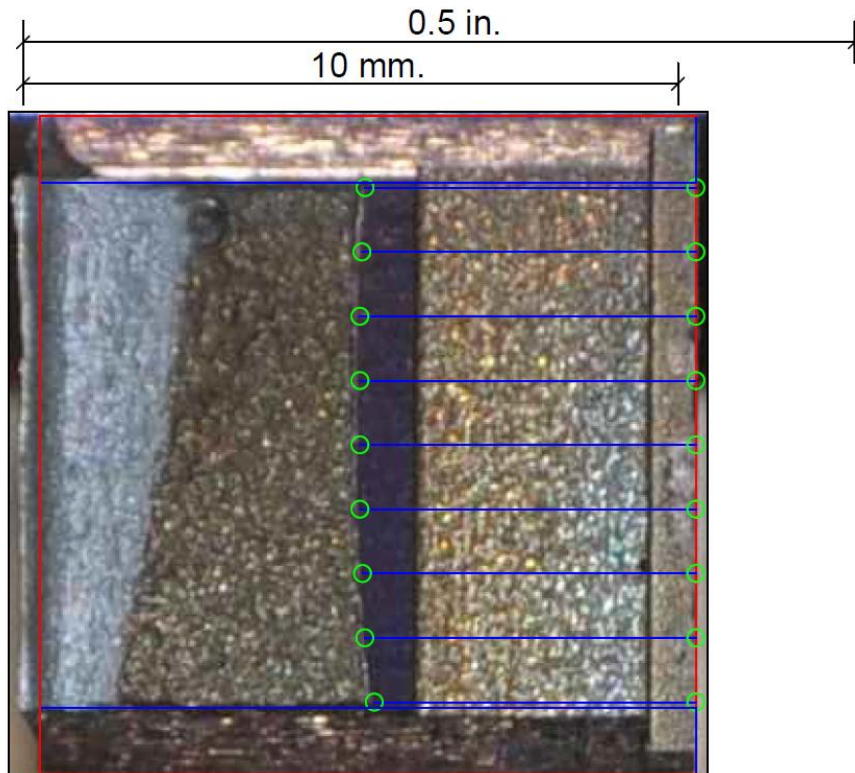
Specimen C15' Fracture Surface
